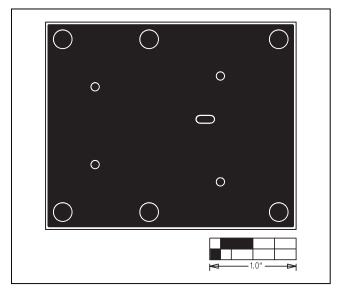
MAX9583 EV Kit PCB Layout—Solder Side
